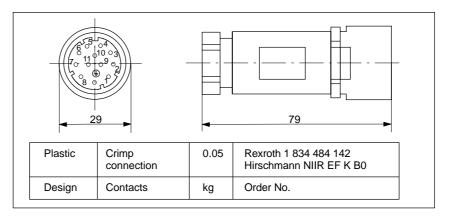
Dimension diagram of circular, 12-pin connector
